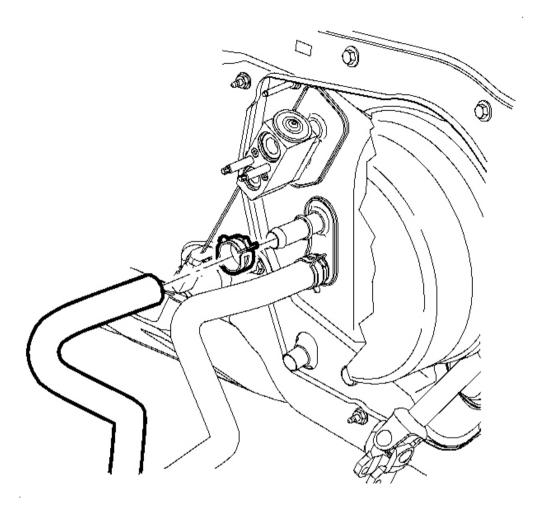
Heater Inlet Hose Clamp & Elbow Fitting Courtesy of GENERAL MOTORS CORP.
